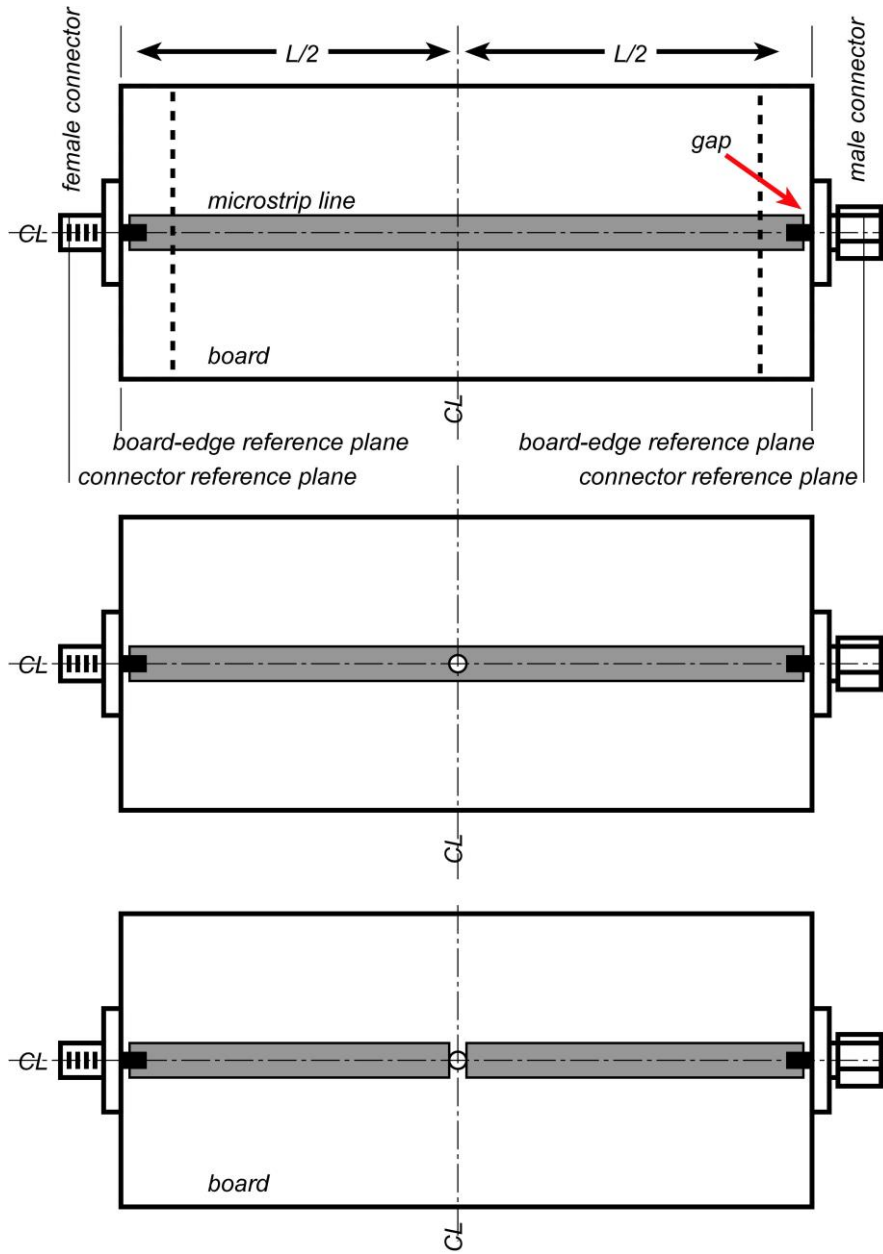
First steps in fixture construction. Through line (top), after drilling a hole (center) and after cutting the lines (bottom)
